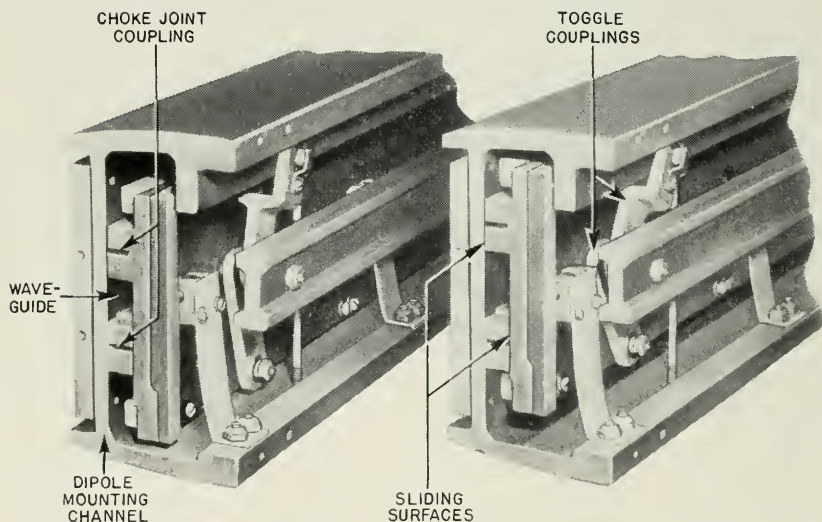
AN/APQ-7 Antenna. Left—Contracted Wave Guide Assembly. Right—Expanded Wave Guide Assembly.
